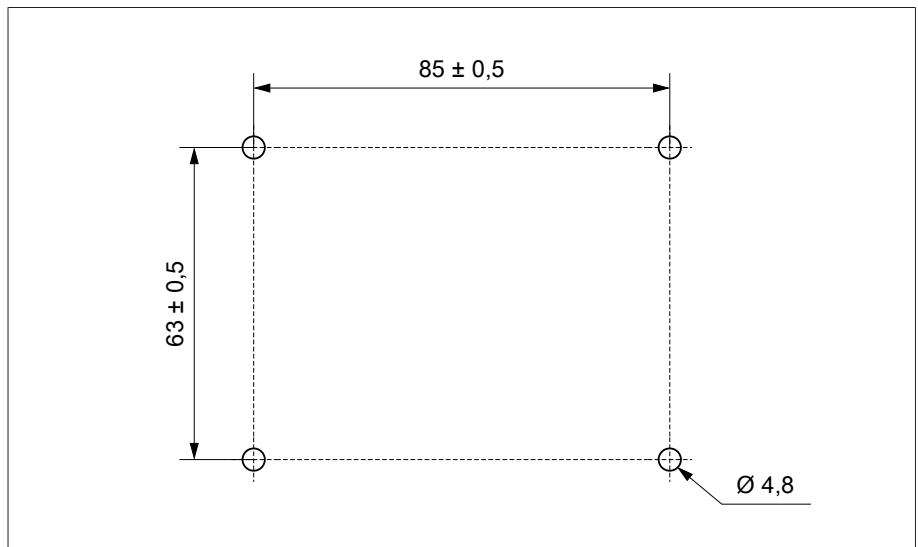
Dimensional drawing for holes in the bushing coupling unit's retaining plate (dimensions in mm)
